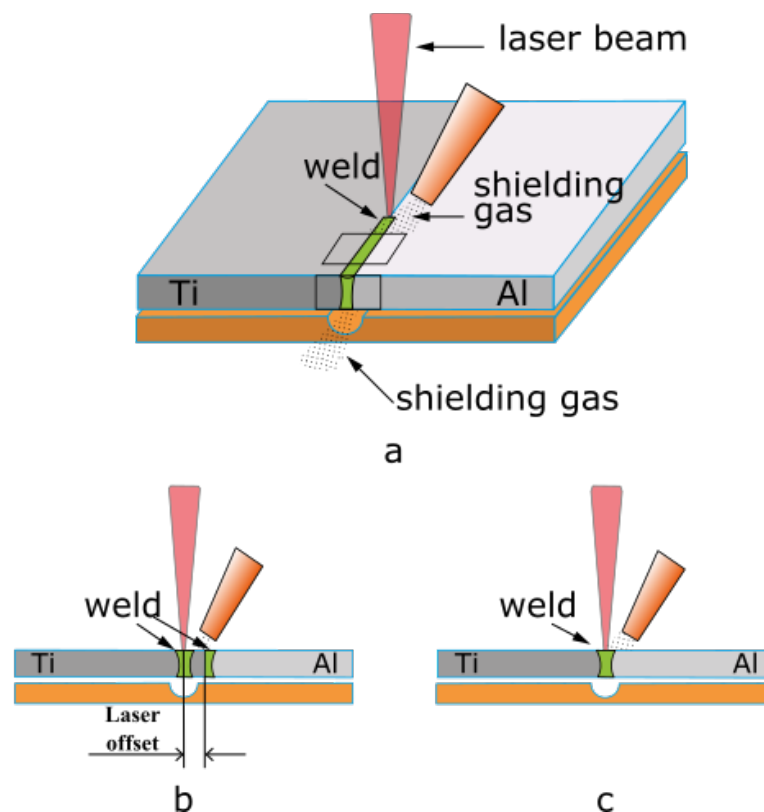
The welding process scheme: a – shielding gas ventilation scheme, b – welding with offset scheme, c – welding with no offset scheme
